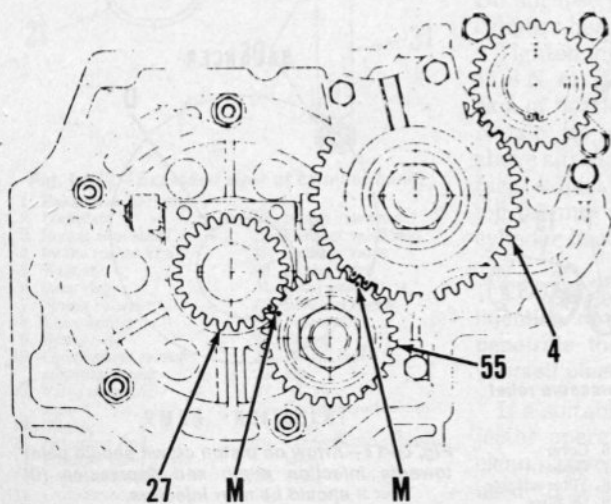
View showing location of timing marks (M) on camshaft gear (4), crankshaft gear (27) and oil pump gear (55).
